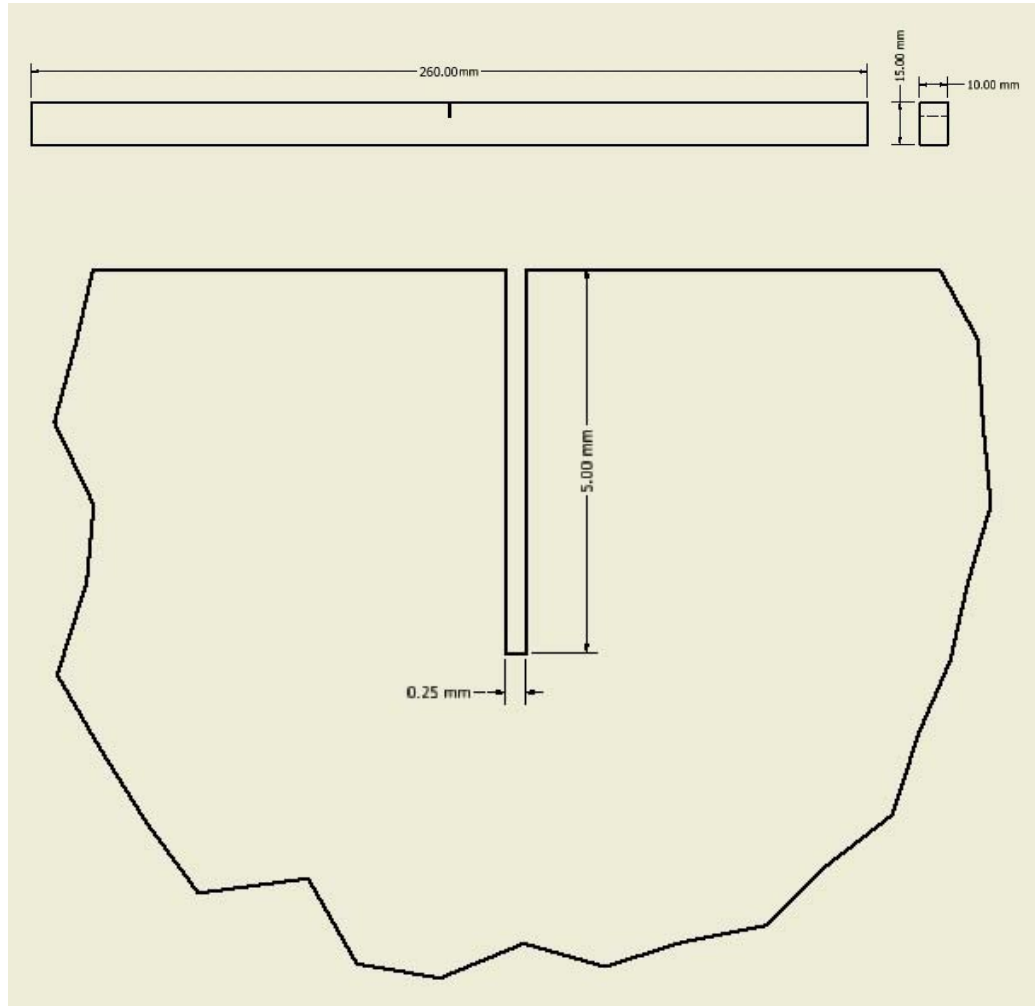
Damaged beam geometry (a); Crack details (b)
